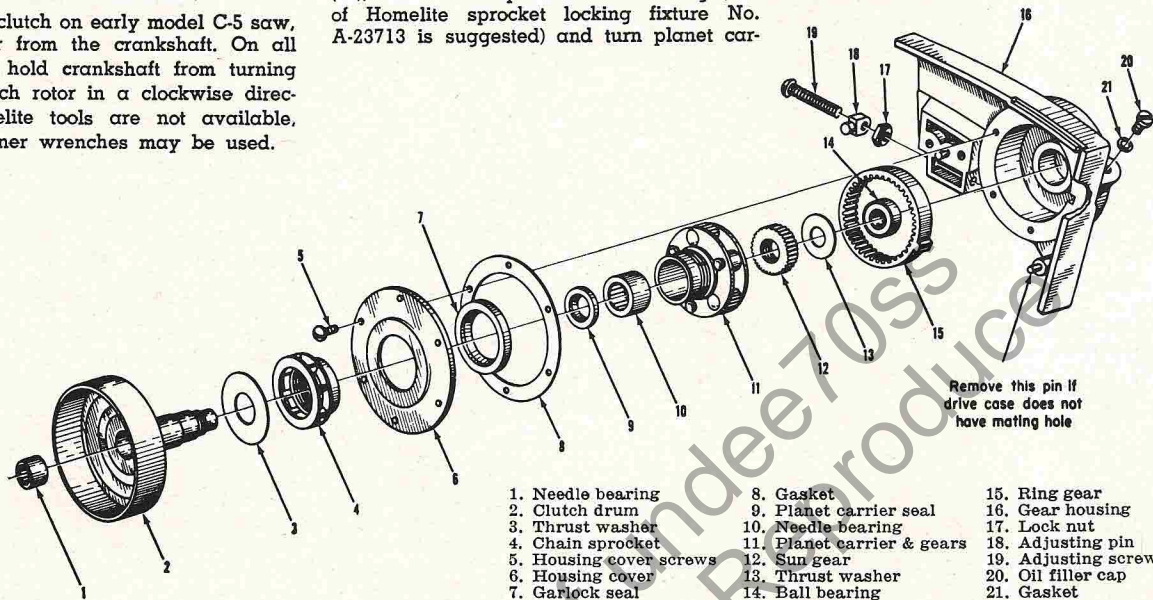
Exploded view of planetary drive unit that is used on C Series saws. When planetary drive is installed, a formica thrust washer should be installed between drum (2) and clutch rotor instead of steel thrust washer (39—Fig. HL56).
